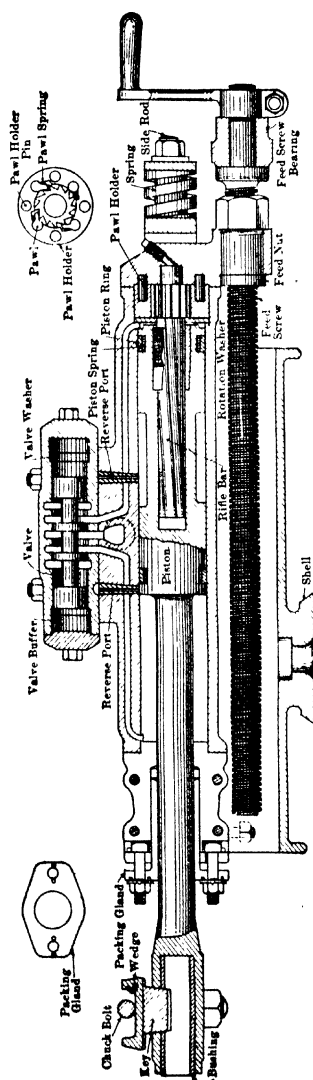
4" Wood " Piston Drill Wood Drill Works.
